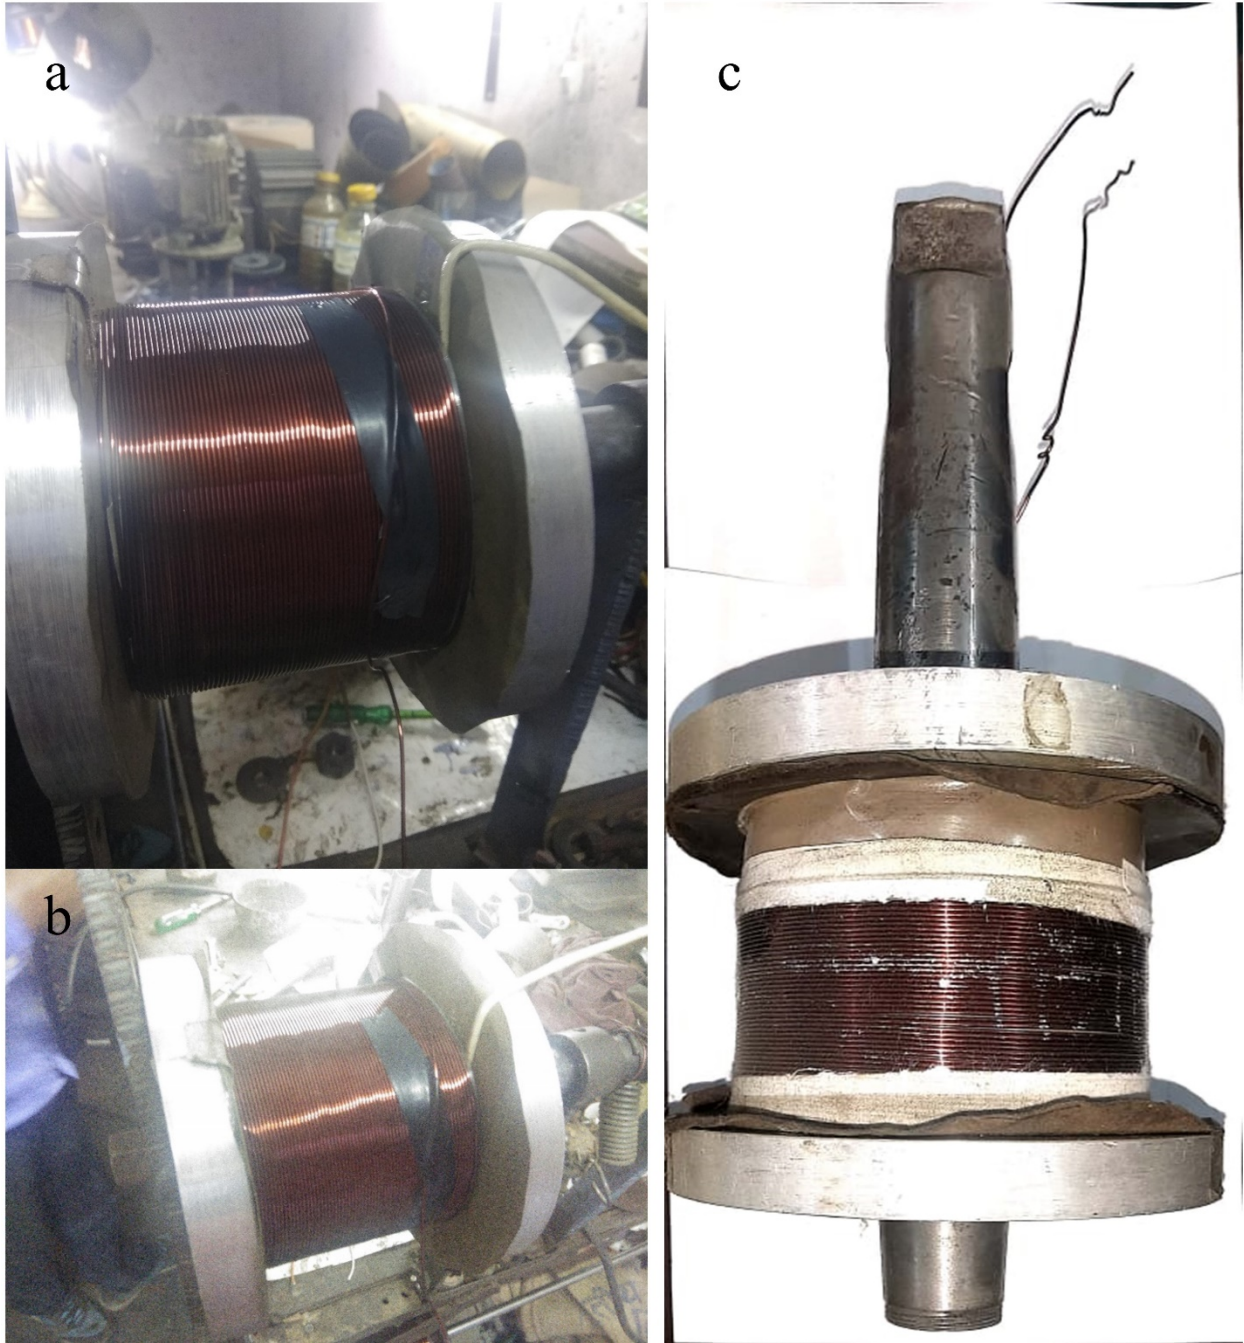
(a, b) Copper wire winding on spool, (c) Fabricated Electromagnetic tool.
